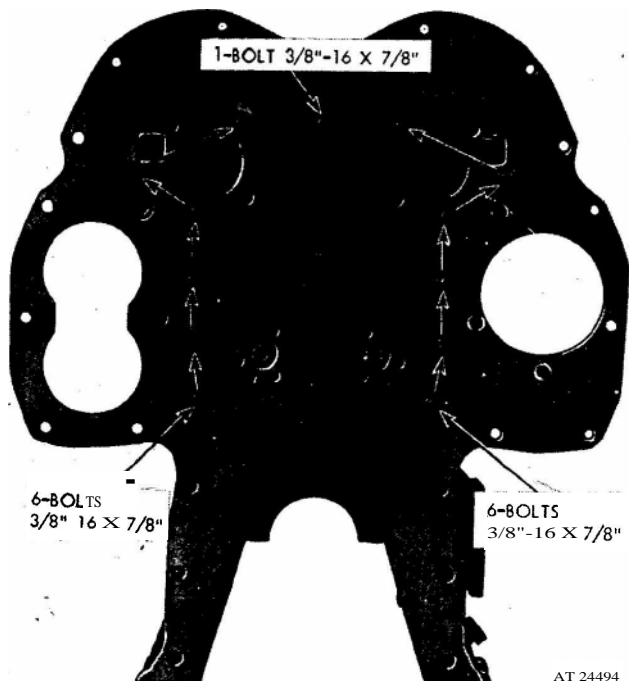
Cylinder block rear end plate mounting—in-line engines.
